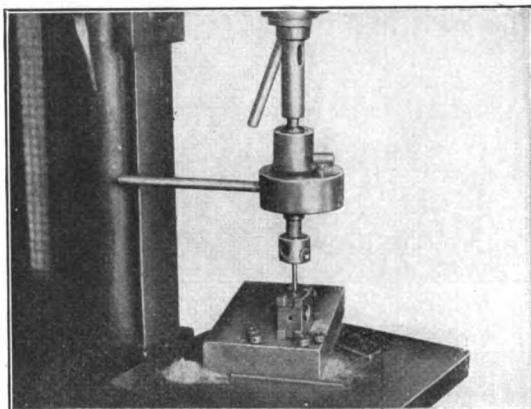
TAPPING HOLES IN END NUTS WITH REVERSING ATTACHMENT
